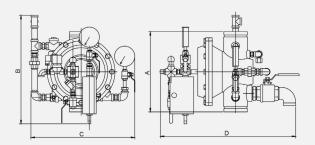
Outline dimensional drawing of deluge valve (Grooved * Flange connection)
